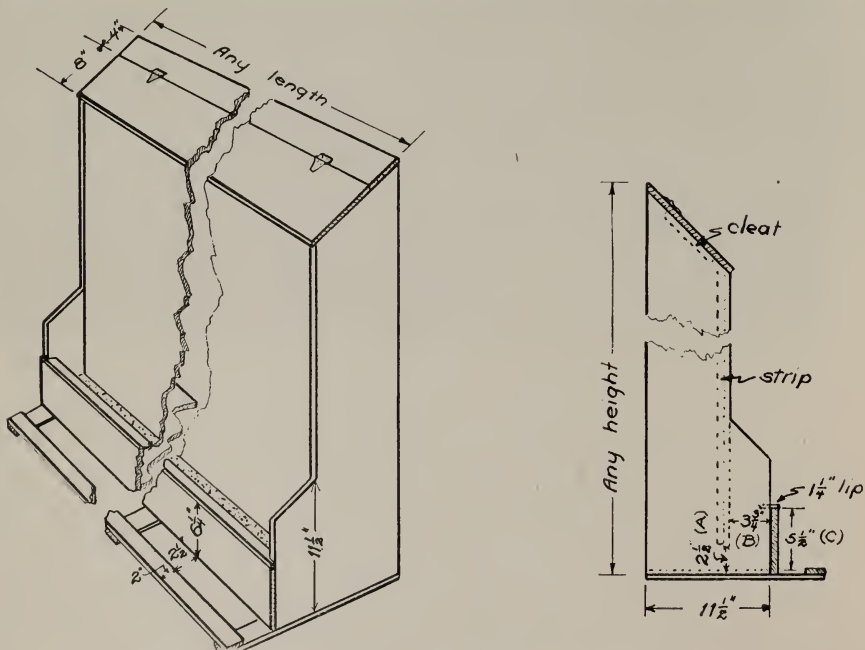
Working plan for wall hopper shown in figure 9.
